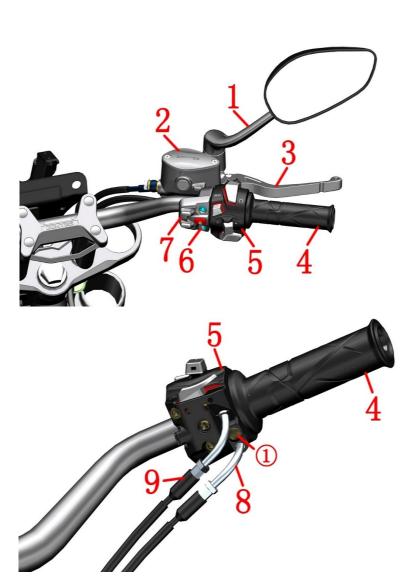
F	FRONT FORK	Right hand component	CHK	40)
